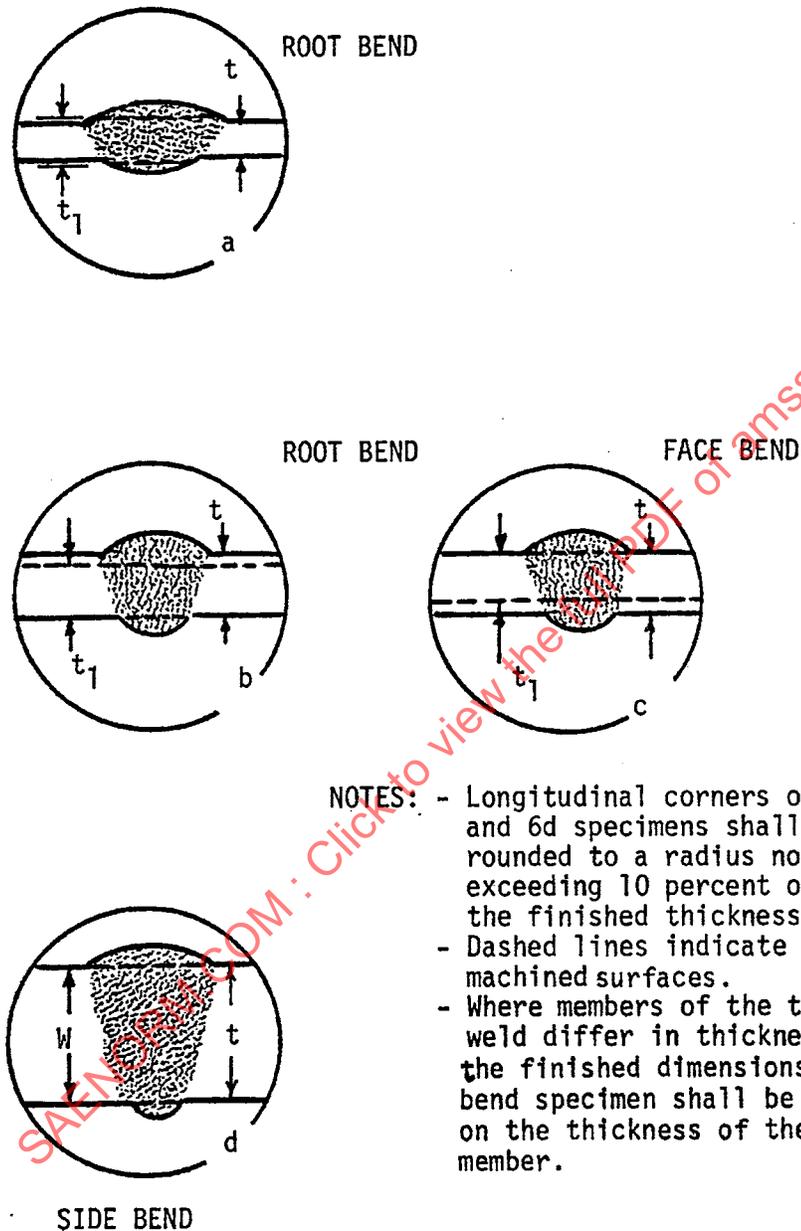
Bend specimens in groove-welded sheet. Continued.
